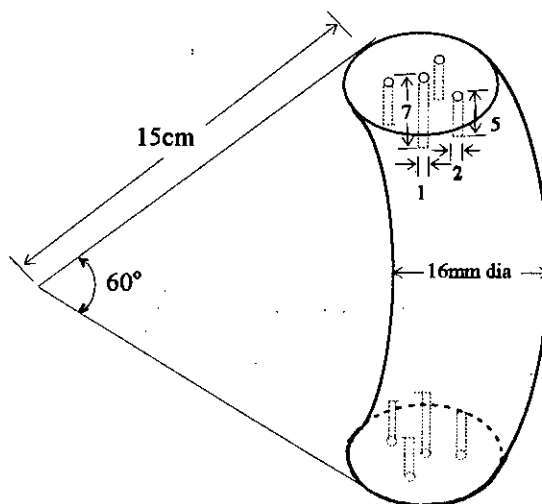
(a) Sectional view of a hexad loop. Dimensions along the width and depth for the screw holes and for the centre stud of the BNC panel jack are shown (all the dimensions are in mm).
